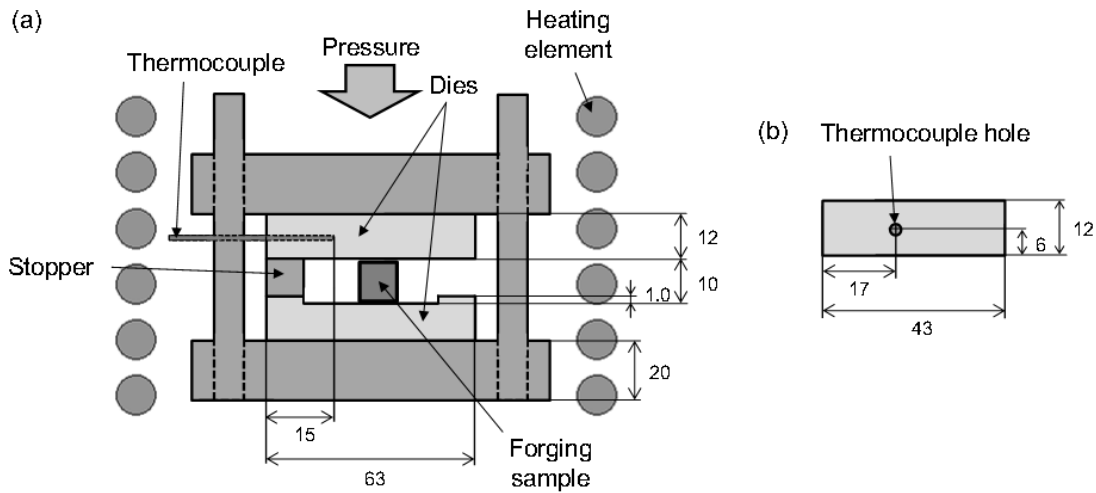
(a) Schematic drawing of the equipment for hot forging (b) dimensions of the upper die and position of the thermocouple hole (all dimensions are in mm).
